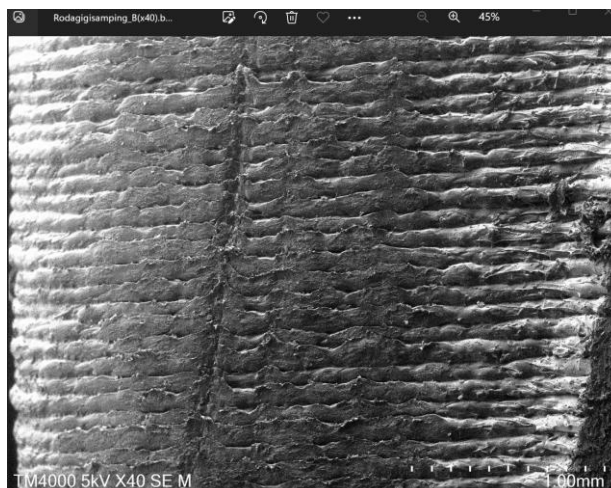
Photo of the tooth surface after the torsion test was carried out under conditions with oil lubrication on the Onyx material
